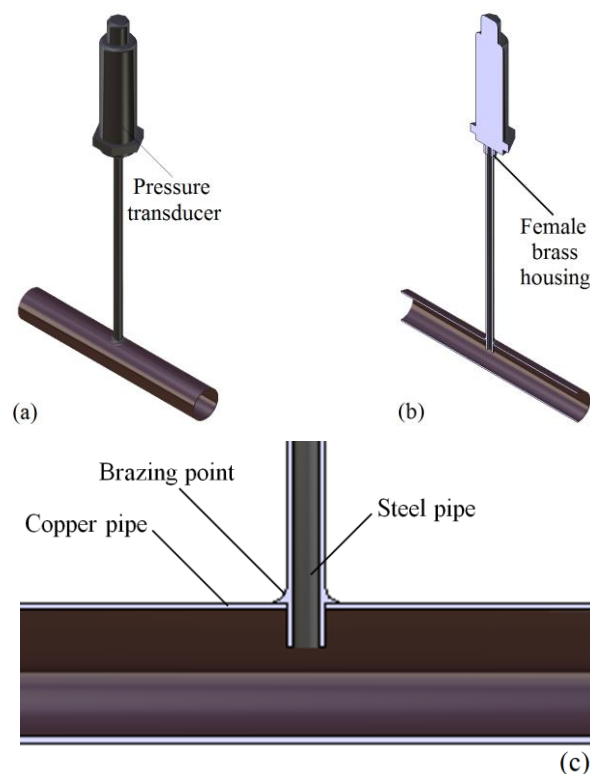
(a) 3D CAD model; (b) cross-section of 3D CAD model; and (c) detailed 2D cross-section view of pressure transducer assembly.
